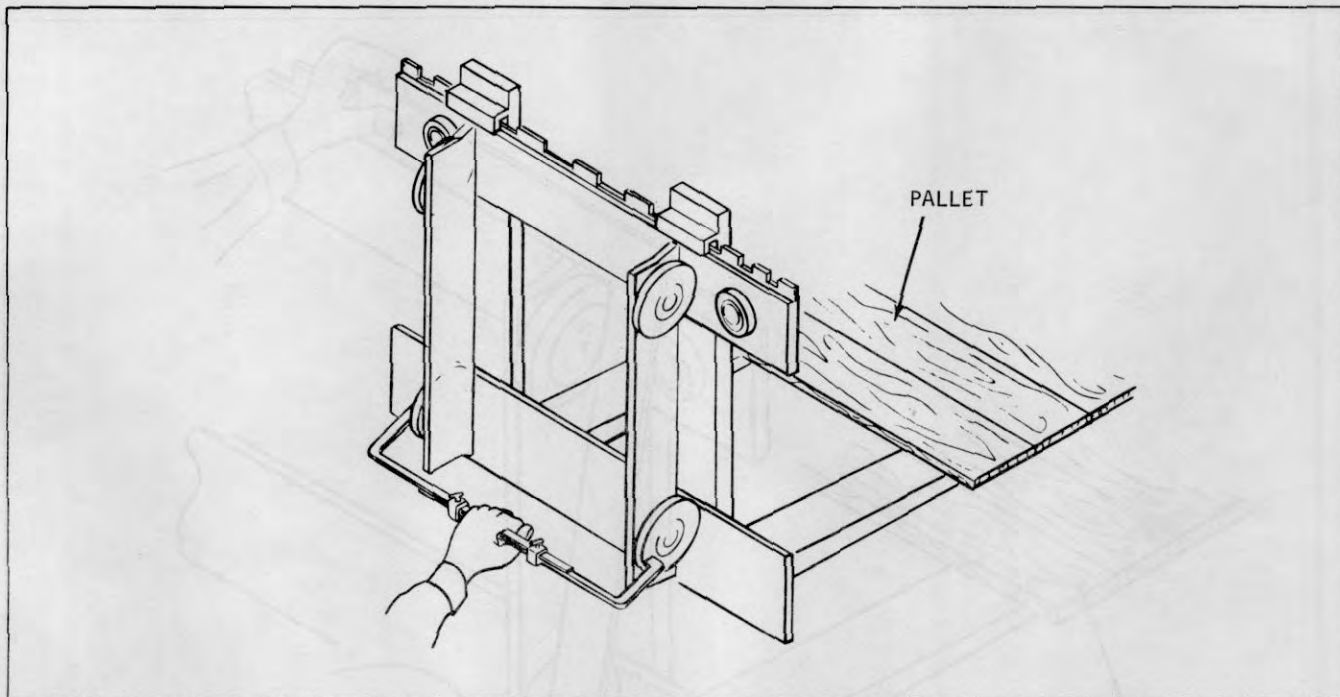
Spanning Lower Rollers (Four Roller Carriage)
